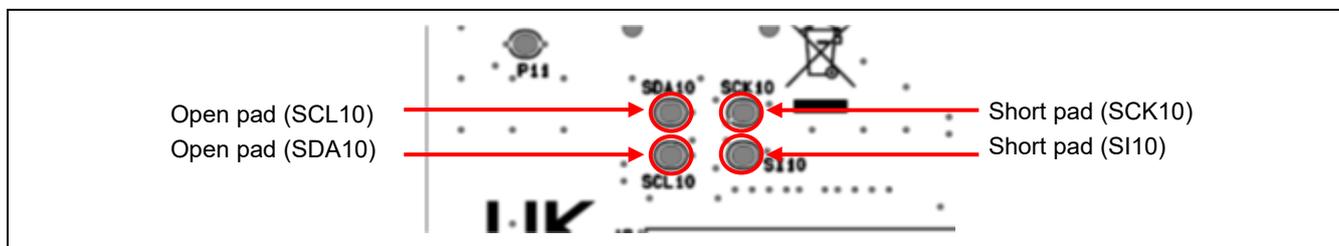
Positions of Open and Short Pads (Pmod™ 2) (Soldered Side)
